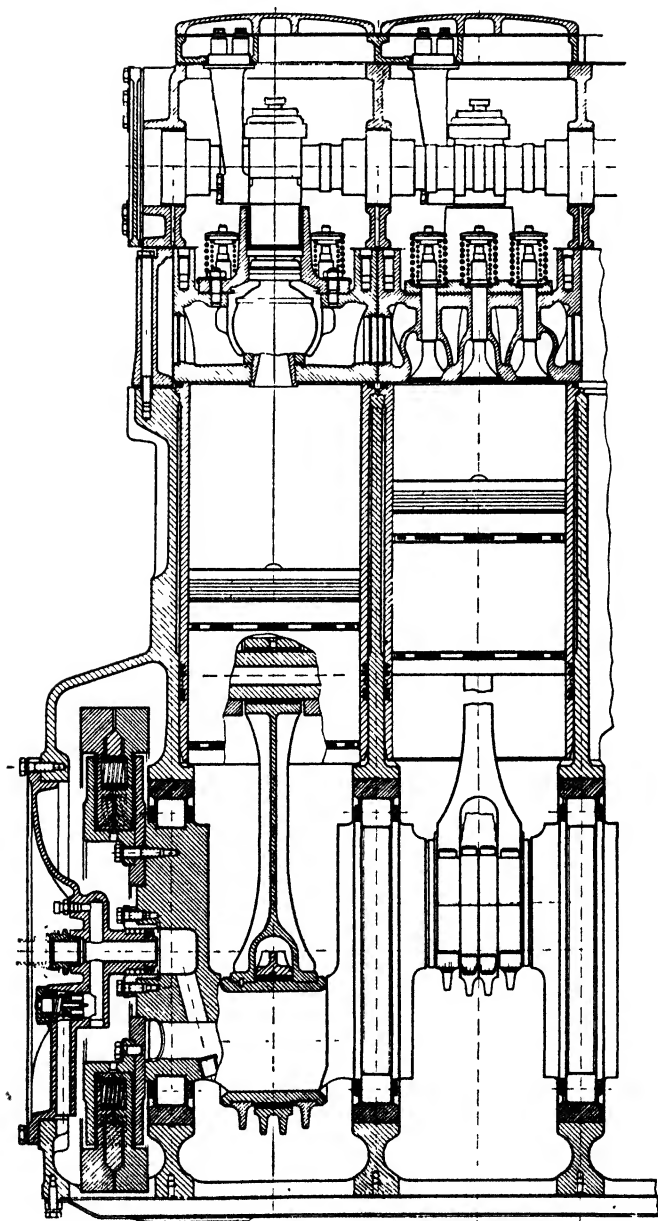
LONGITUDINAL SECTION OF FORWARD PART OF MAYBACH TWELVE-CYLINDER ENGINE.
